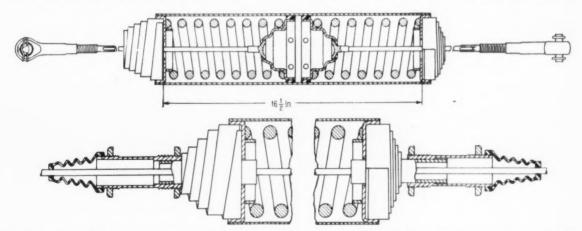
Above: arrangement of the springs and ties. Below: an enlarged view showing the tubular components that locate the unit and support it in two brackets on the side frame
